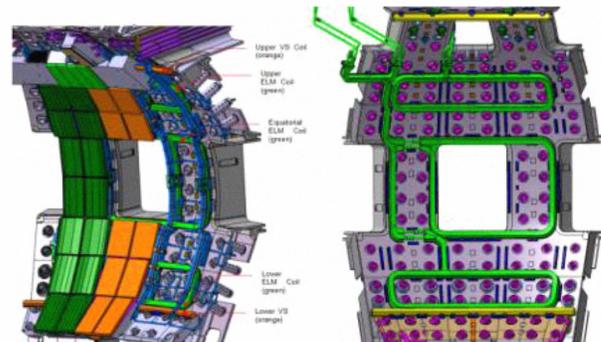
ELM Coils in Standard Vacuum Vessel Sector With and Without Blanket Shield Modules
